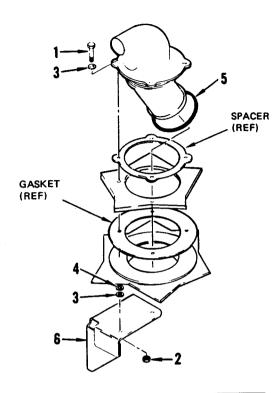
Removal; Aft Fuselage Tank (Sheet 5)
